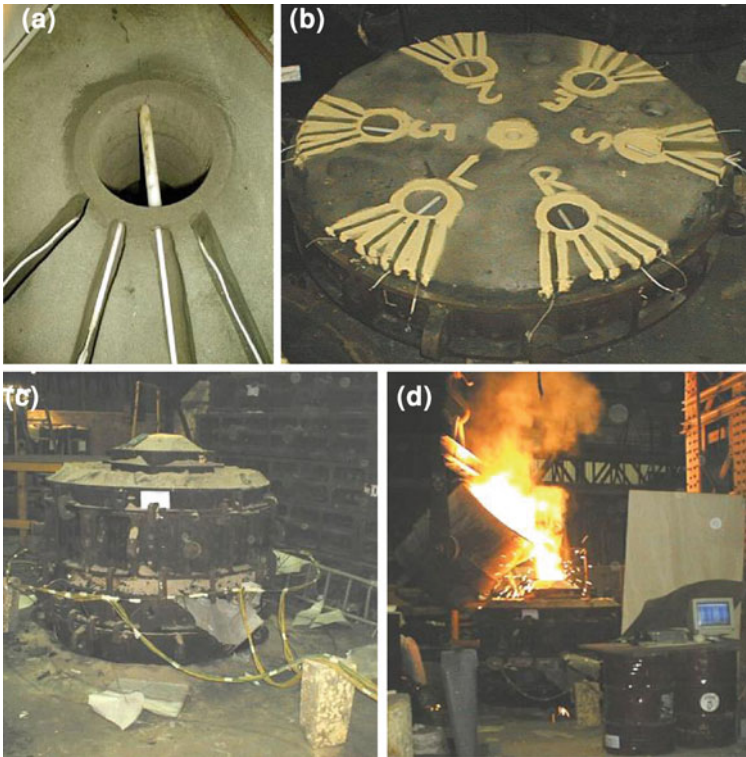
The course of the experimental tests—sleeves: a thermocouples in mould cavity, b view of the middle part of the mould, c view of assembled mould (with the thermocouples connections), d pouring the mould with cast steel (with data acquisition stand)
